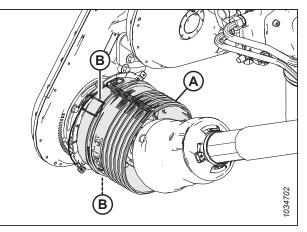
Driveline with Shield Installed on Float Module Gearbox Shaft
